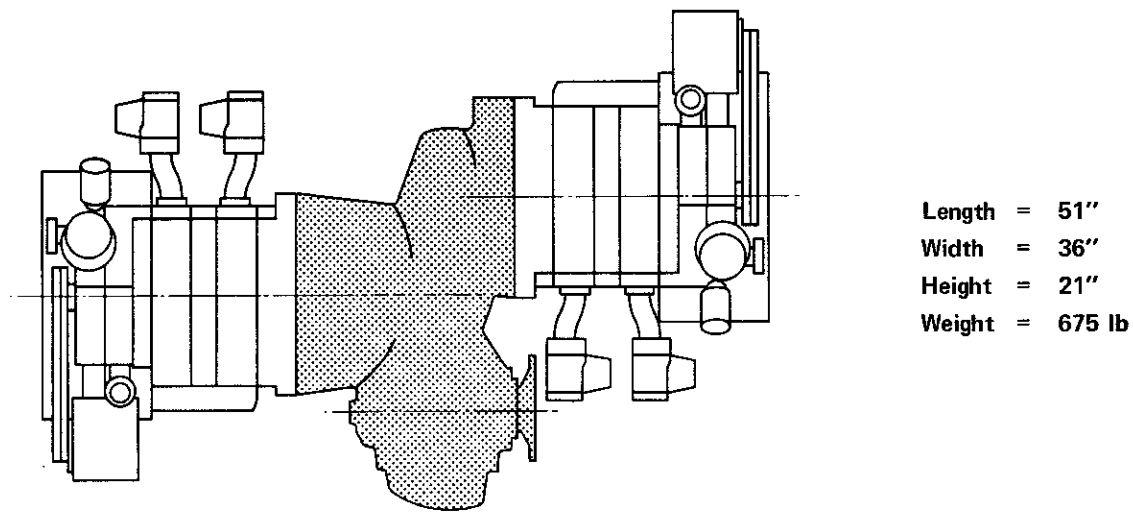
Two NSU KKM 612 engines coupled by gear and chain drives
